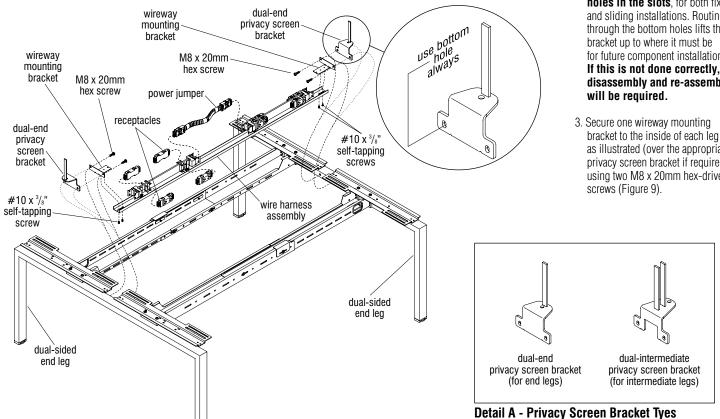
Dual-Sided Stand-Alone Benching with Wire Harness
